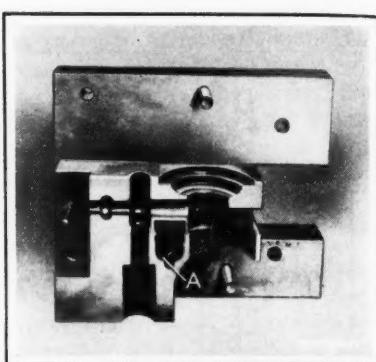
Upper Member of Die for Casting A, Fig. 1
